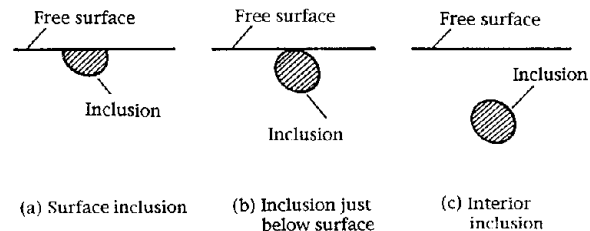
Various locations of inclusions causing fatigue fracture.
